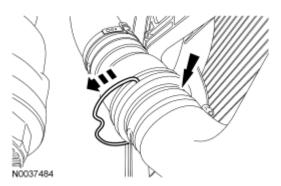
Removing Retaining Clip And Locating Lower Radiator Hose Courtesy of FORD MOTOR CO.
